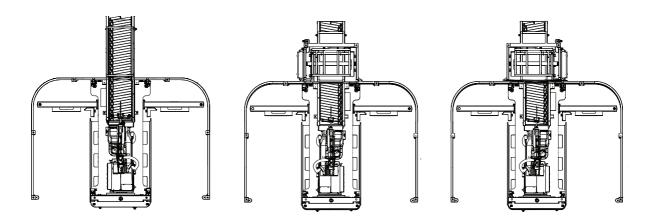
Centre conveyor position alternatives with or without interlayer module.
